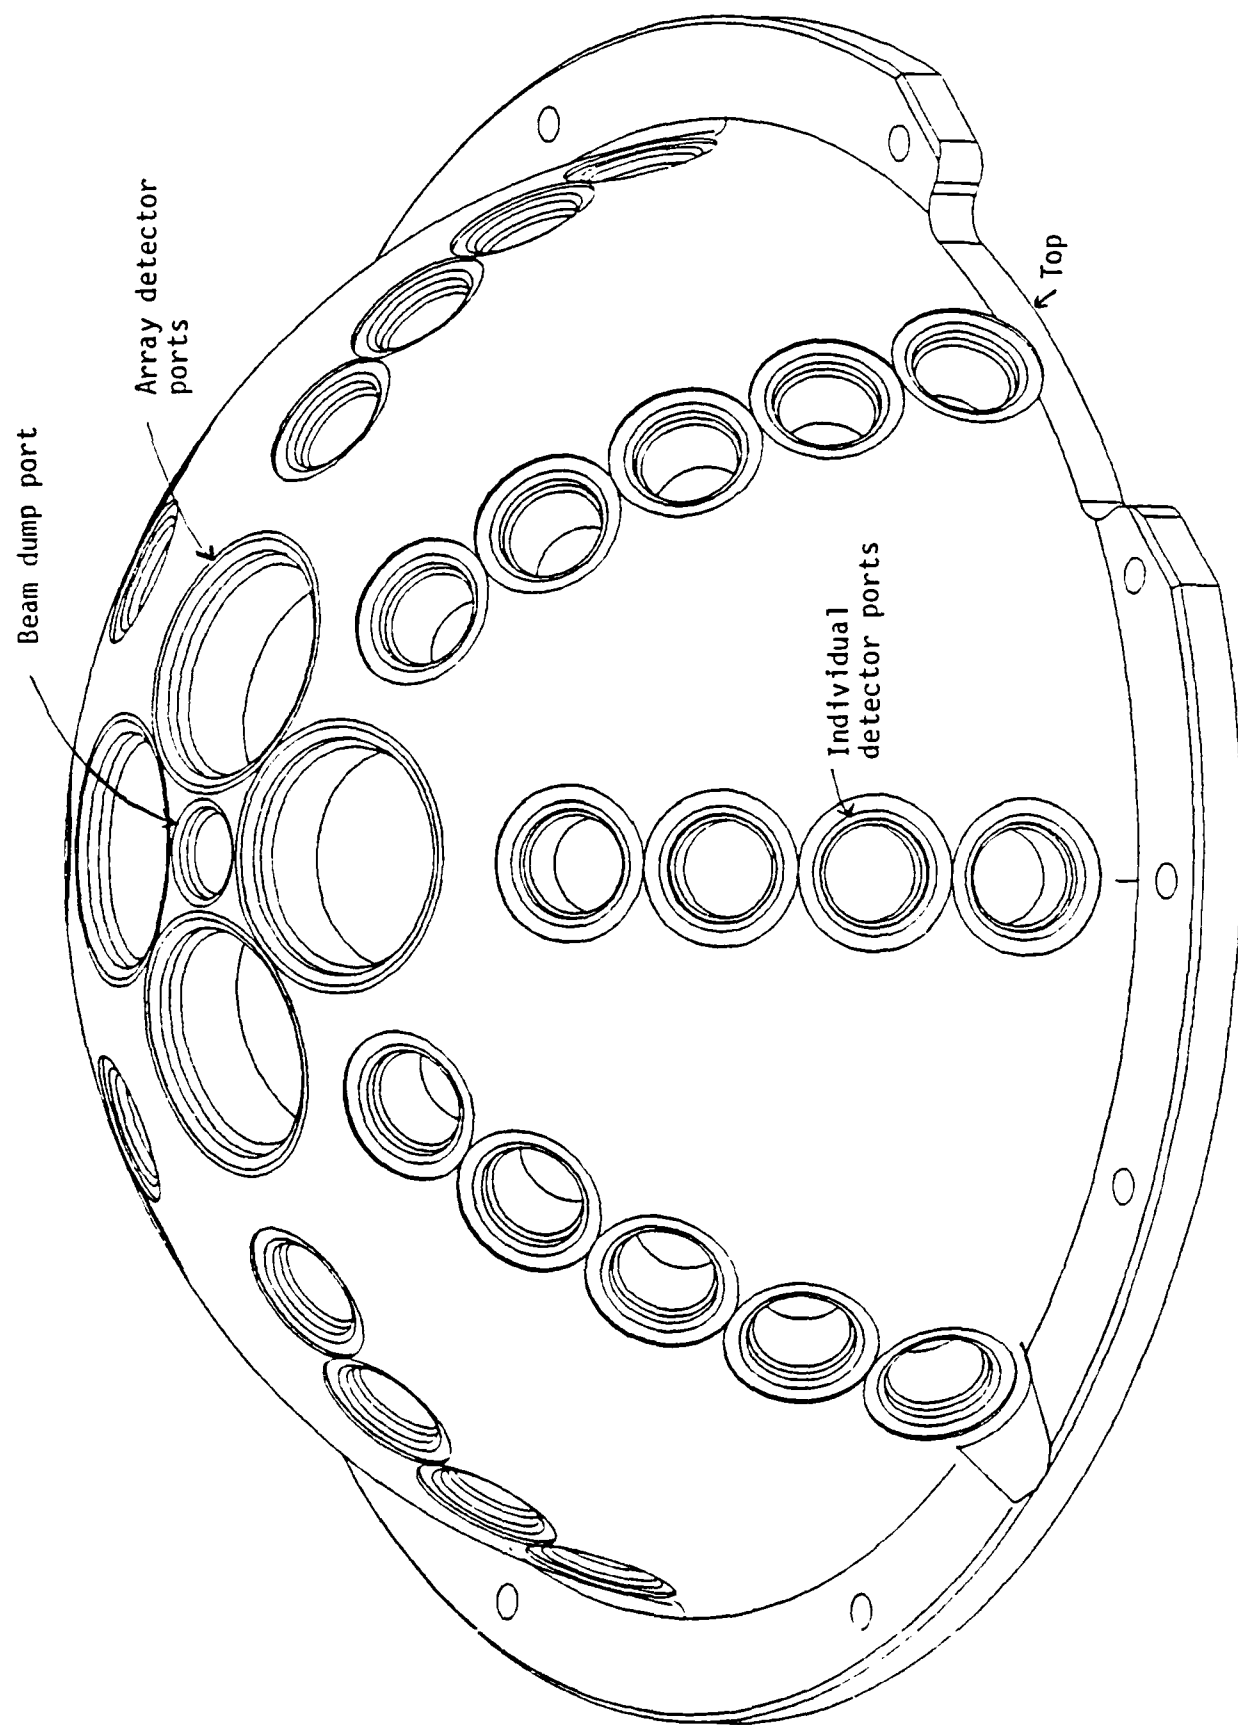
Isometric Drawing of Forward Scatter Hemisphere
